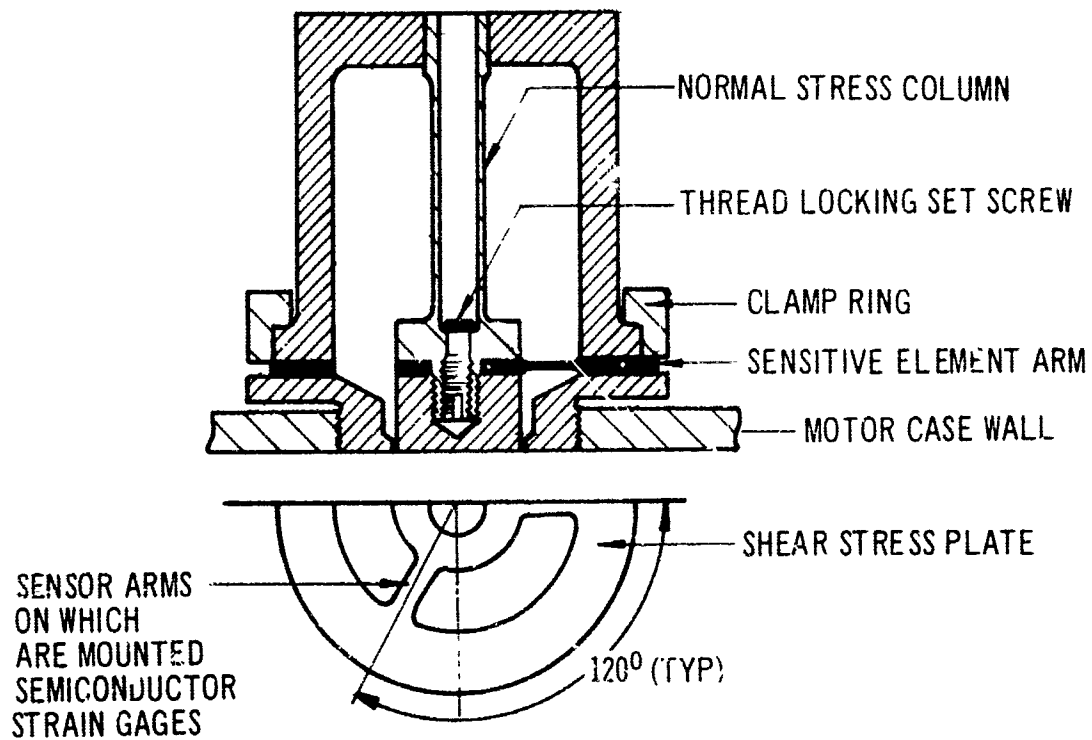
Prototype Through-the-Case Shear Stress Transducer
